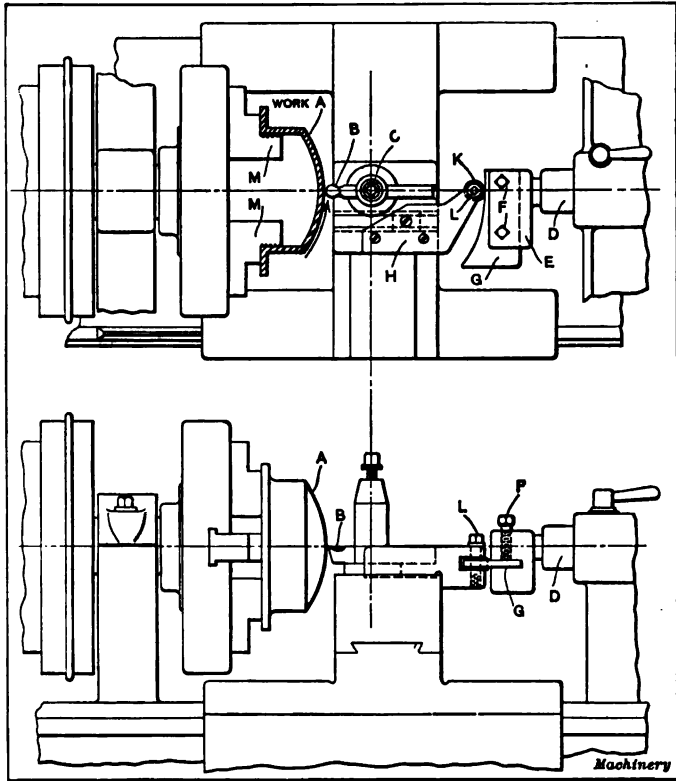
Simple Attachment for Convex Turning in Engine Lathe
